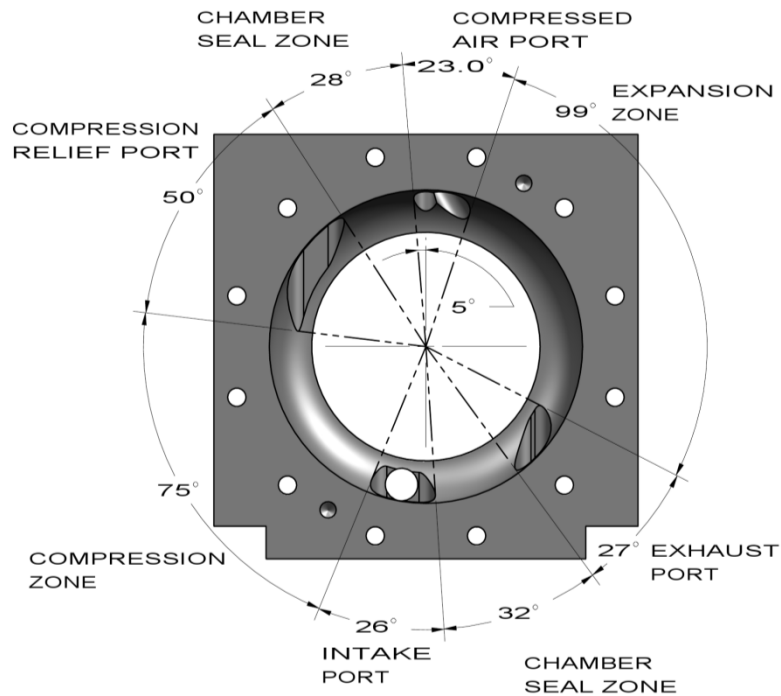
Illustration of angular port locations in the toroidal pneumatic motor prototype.
